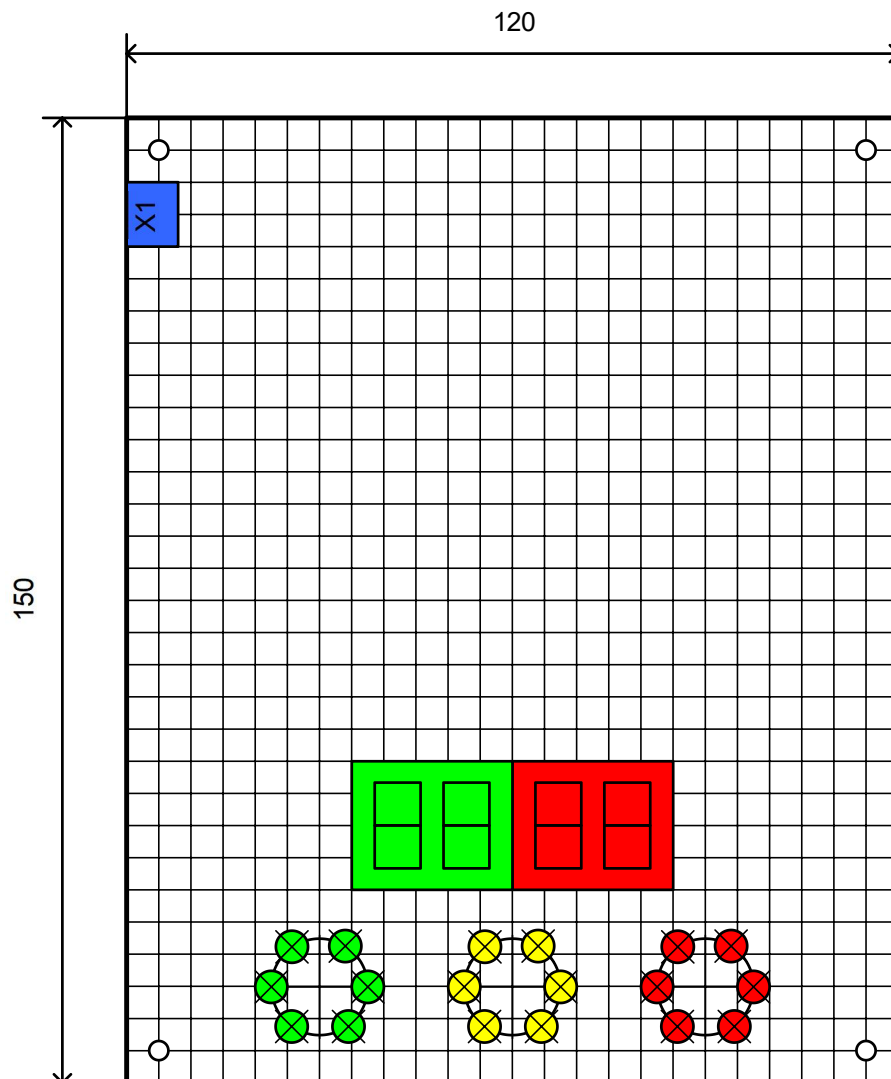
PCB layout requirements (unit: mm, Grid=5mm)
